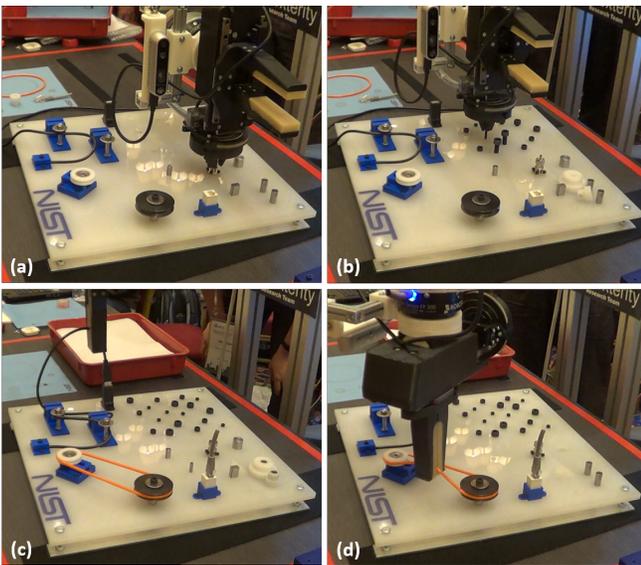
The proposed system performing: (a) BNC connector assembly, (b) fastener threading, (c) cable disassembly, and (d) belt disassembly during the IEEE IROS 2019 Robotic Grasping and Manipulation Competition.
